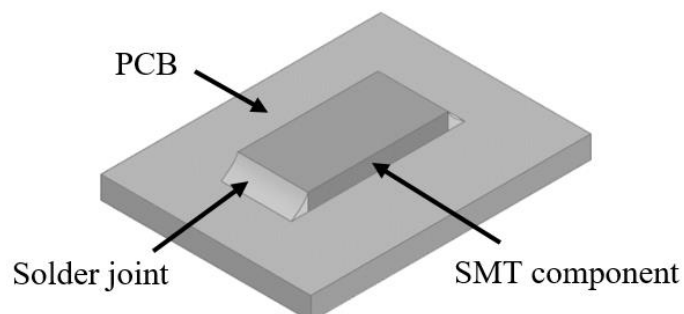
3D model of the SMT component, solder joint and PCB [16].
